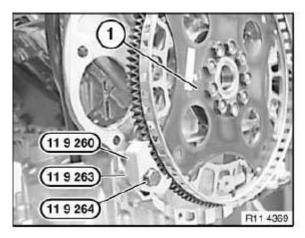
Identifying Flywheel And Special Tools Courtesy of BMW OF NORTH AMERICA, INC.
